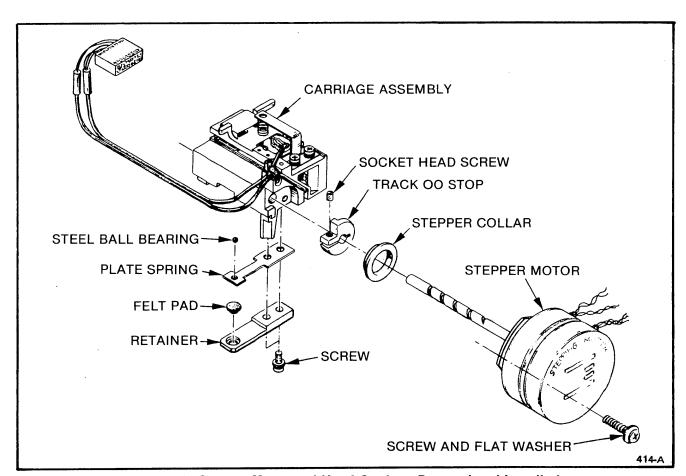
Stepper Motor and Head Carriage Removal and Installation
